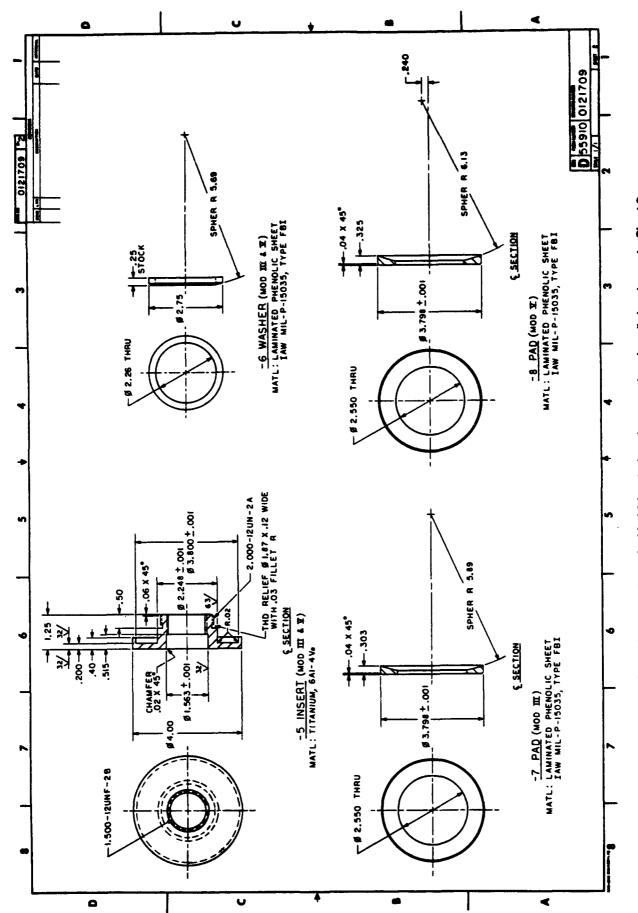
Connector insert for Mod 3 hemisphere incorporating phenolic bearing pade, Sheet 2.
